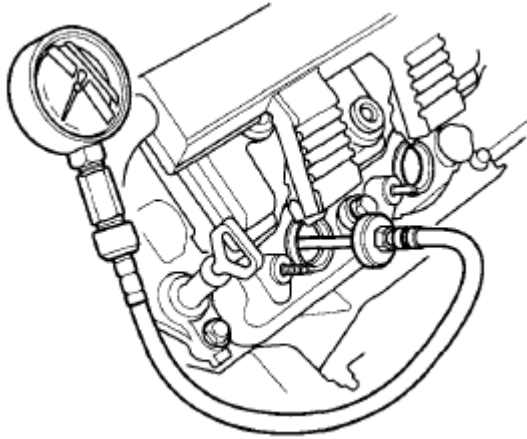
Identifying Compression Gauge And Spark Plug Hole
